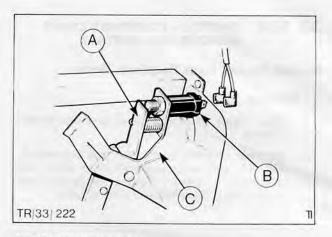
Stop light switch A – Brake pedal B – Stop light switch
